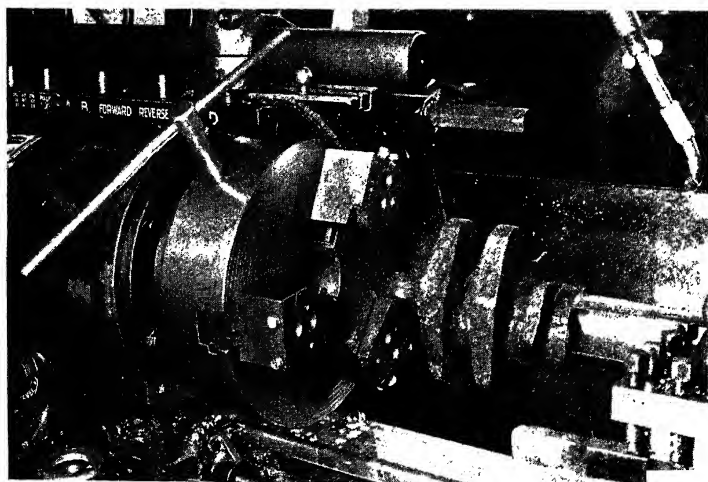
PRODUCTION OF LARGE MACHINED FITTING ON NO. 8 WARD LATHE (8).
